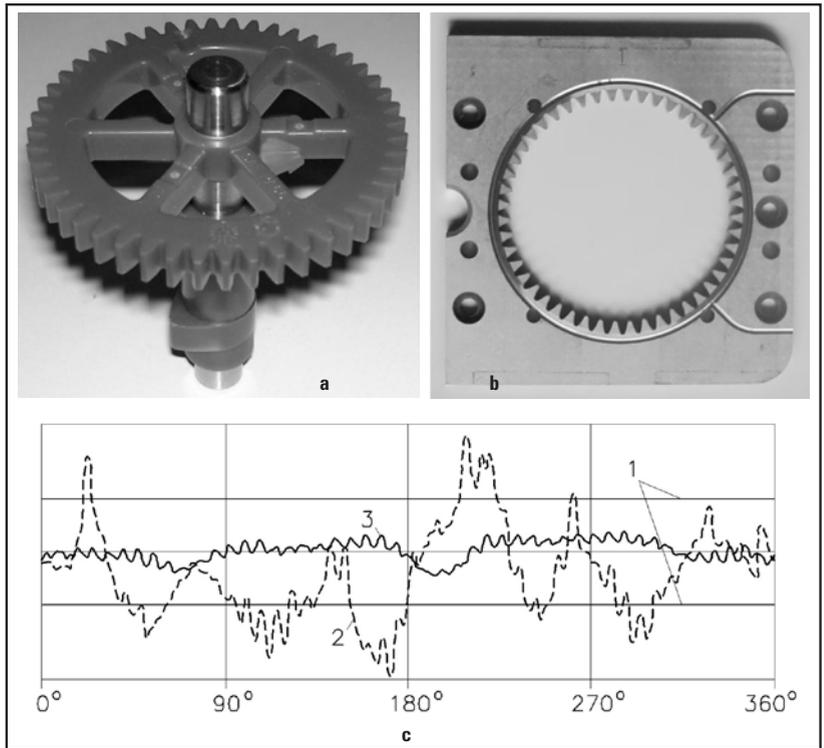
Genetic Molding Solution application: a) camshaft gear; b) gear mold cavity; c) roll rest chart overlay; 1) total composite tolerance limits; 2) initial specimen chart; 3) final gear chart.
